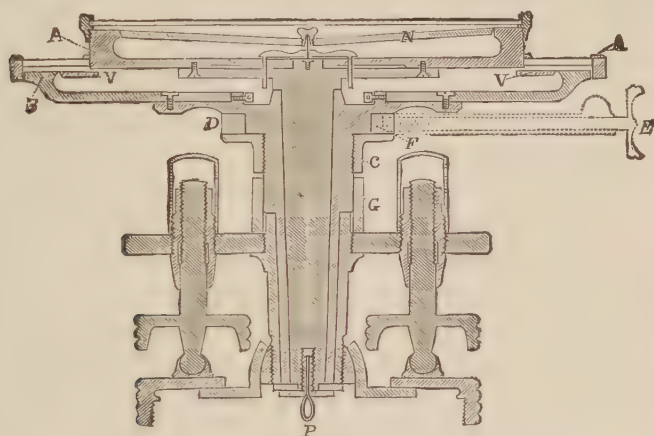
SECTION OF ENGINEERS' TRANSIT.
